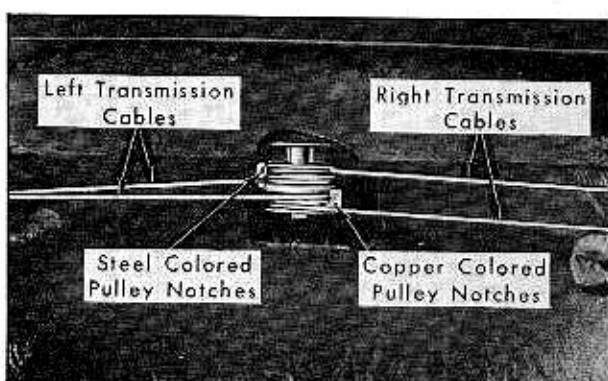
Transmission Cable to Auxiliary Drive Pulley Attachment
